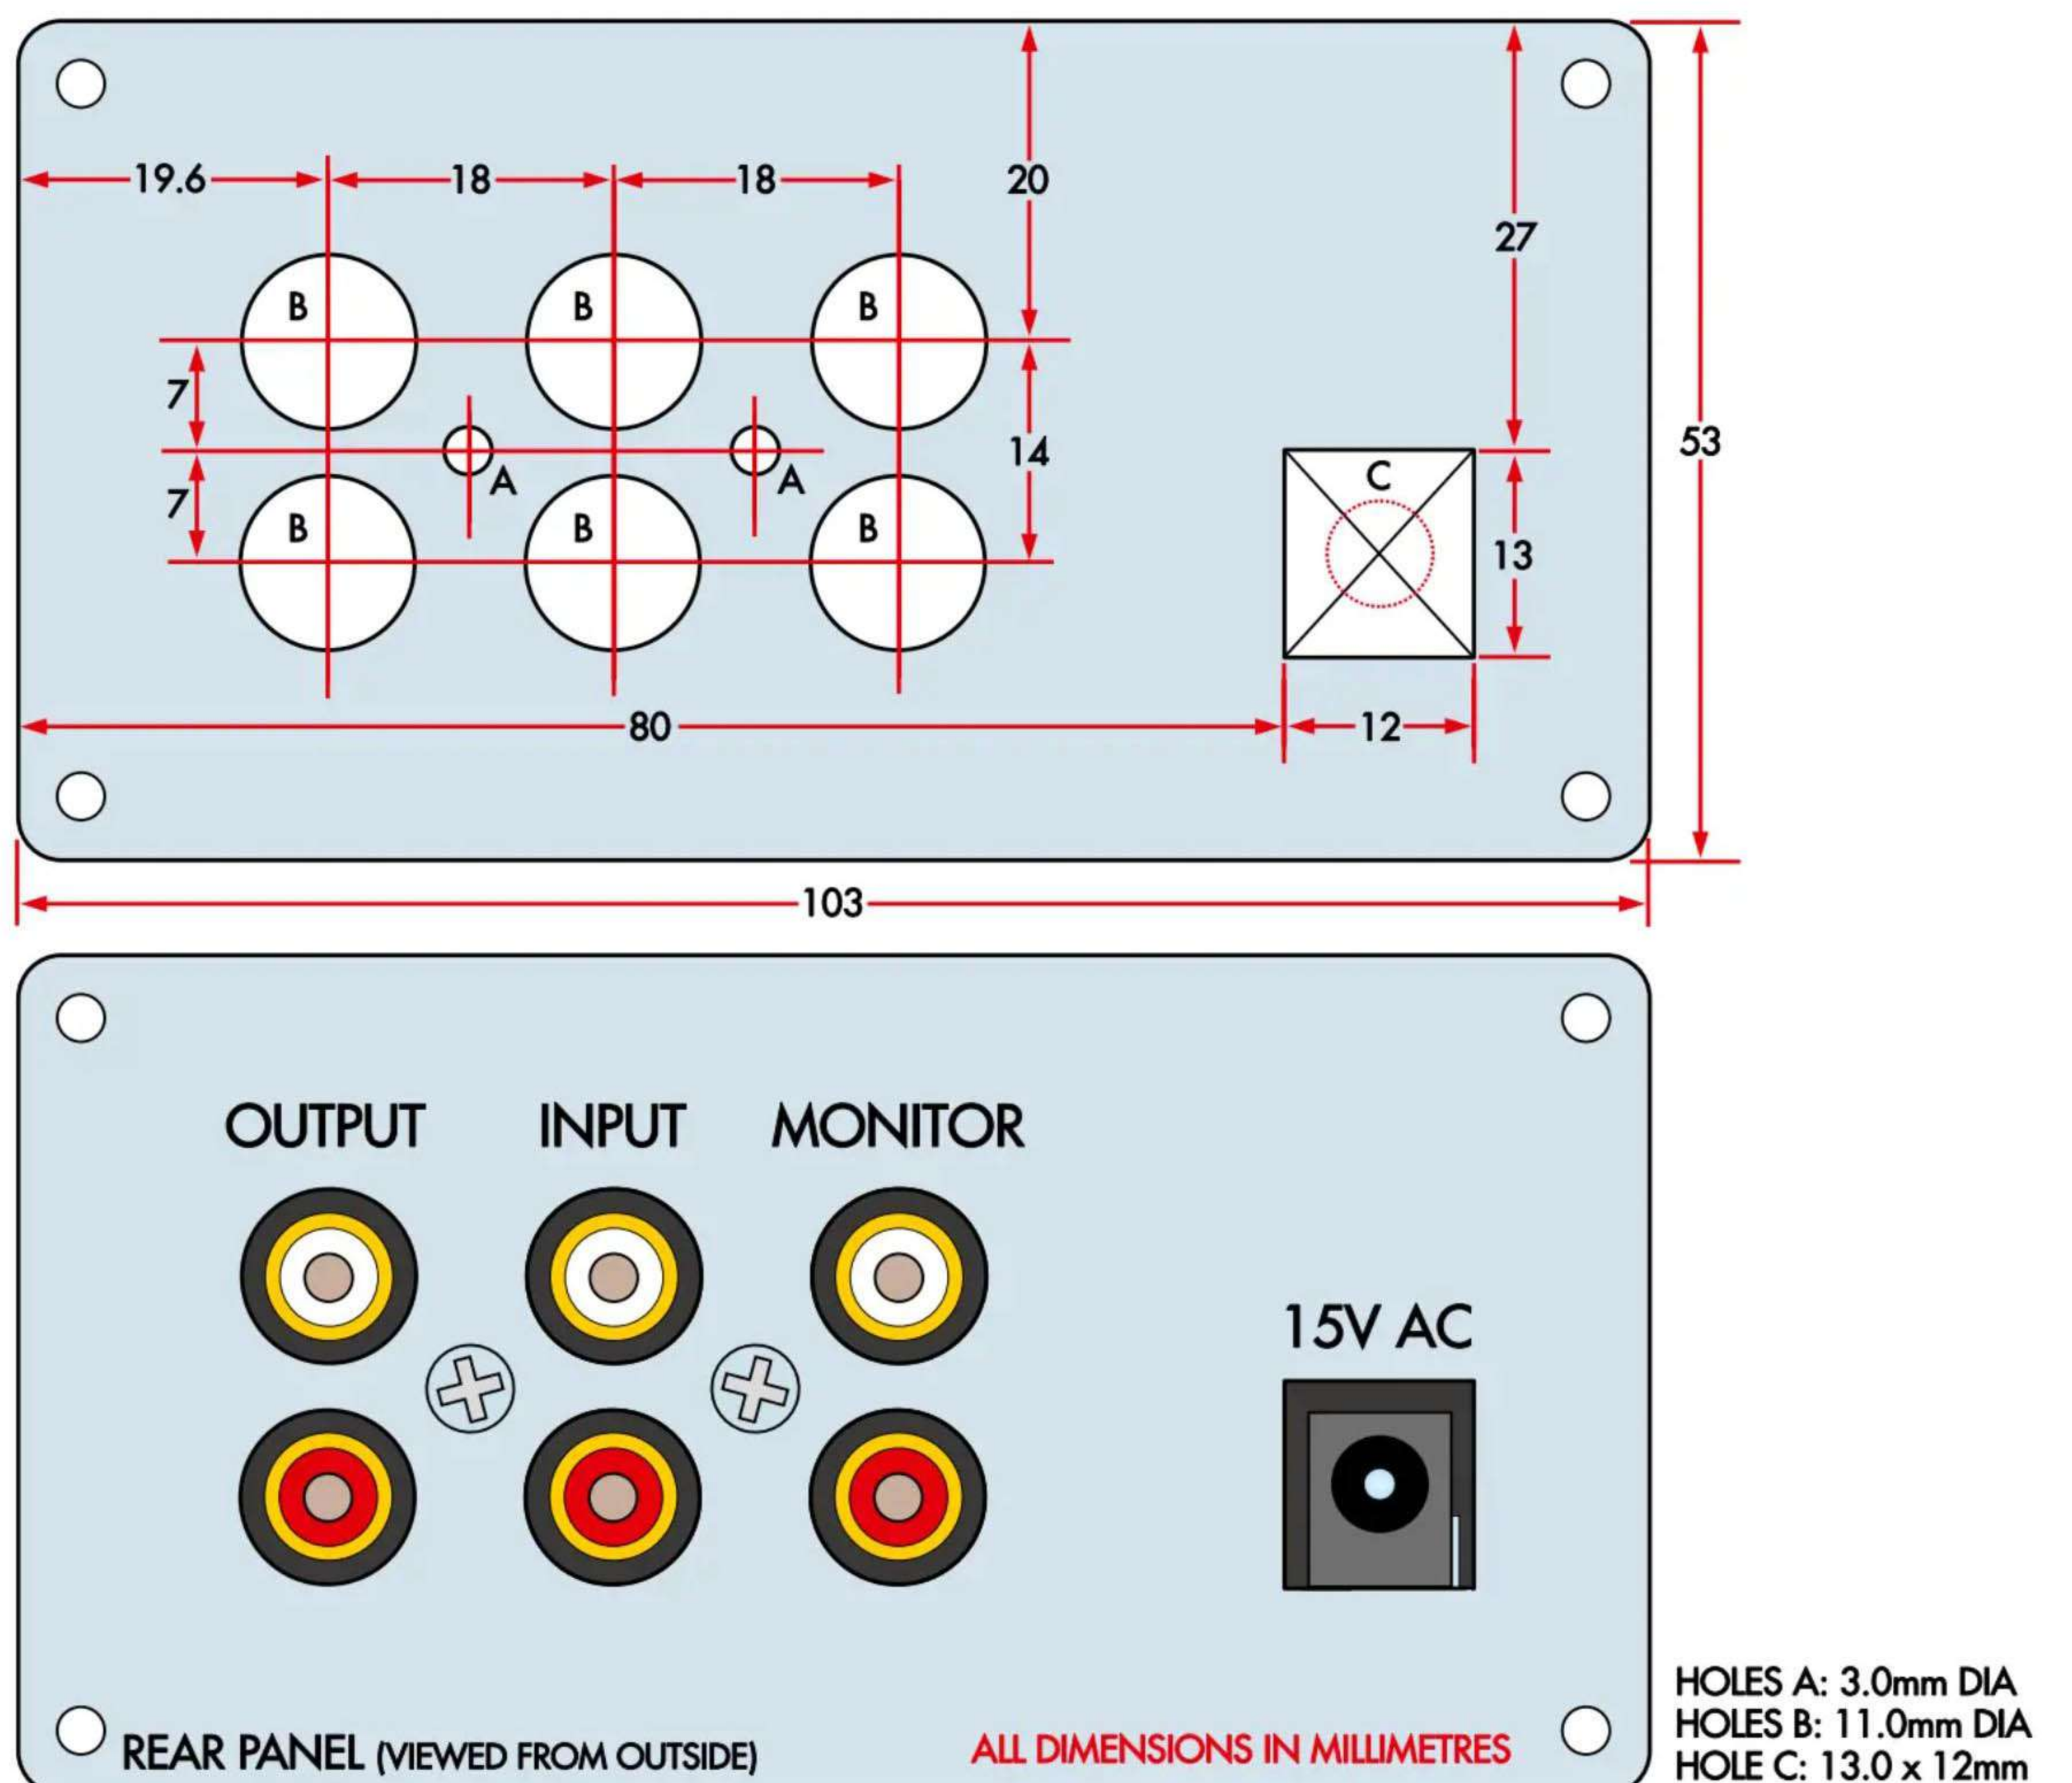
drill the rear panel as shown here, again paying attention to which side has the holes countersunk. For the rectangular hole, you can drill an 11mm hole and then file the corners out. Otherwise, you can drill out the dotted hole marked in red which only leaves enough room for the plug sleeve.
